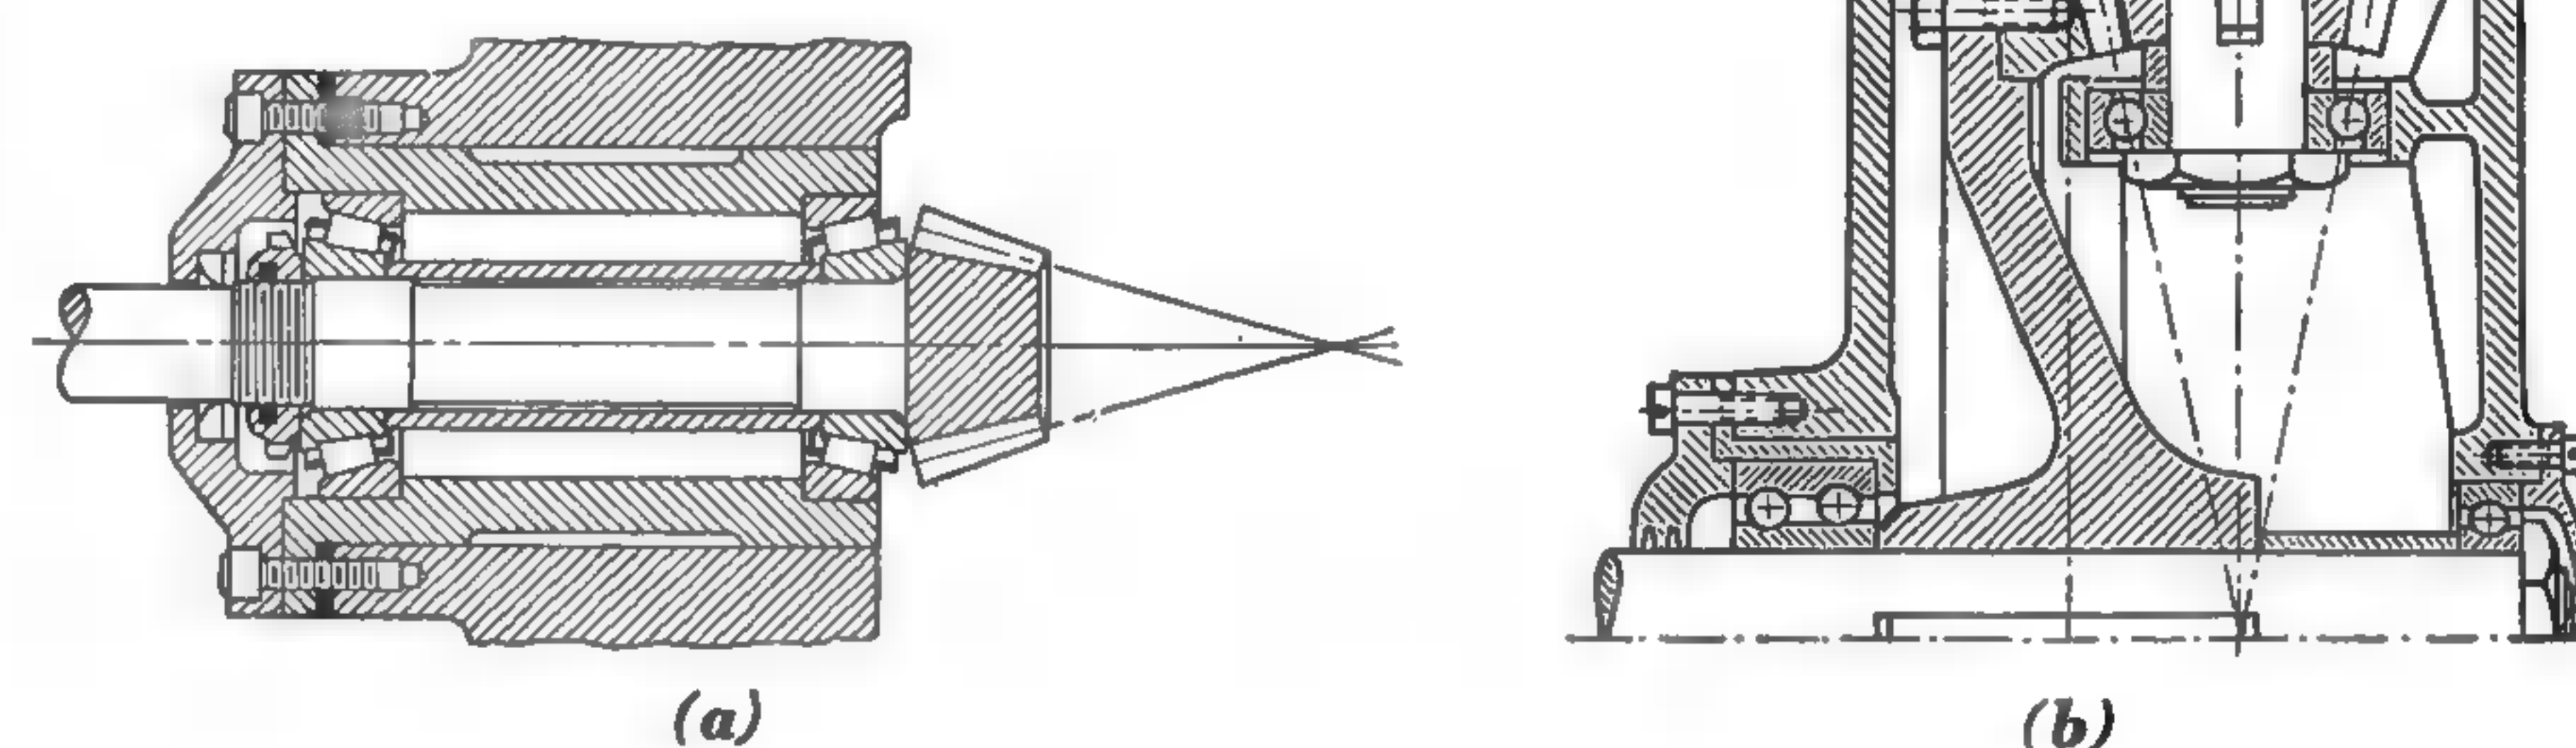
Bevel-gear mountings with roller and ball bearings.
